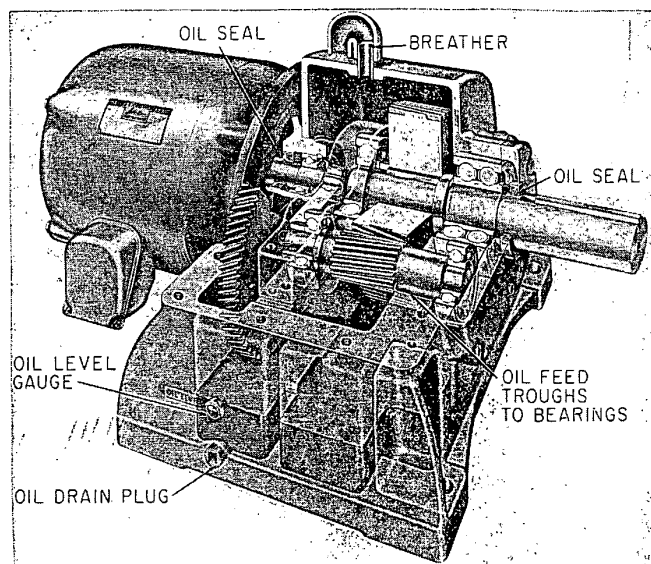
Gear motor with splash-lubricated double-reduction gearing. (Courtesy of Westinghouse Electric Corporation, Pittsburgh, Pa.)
